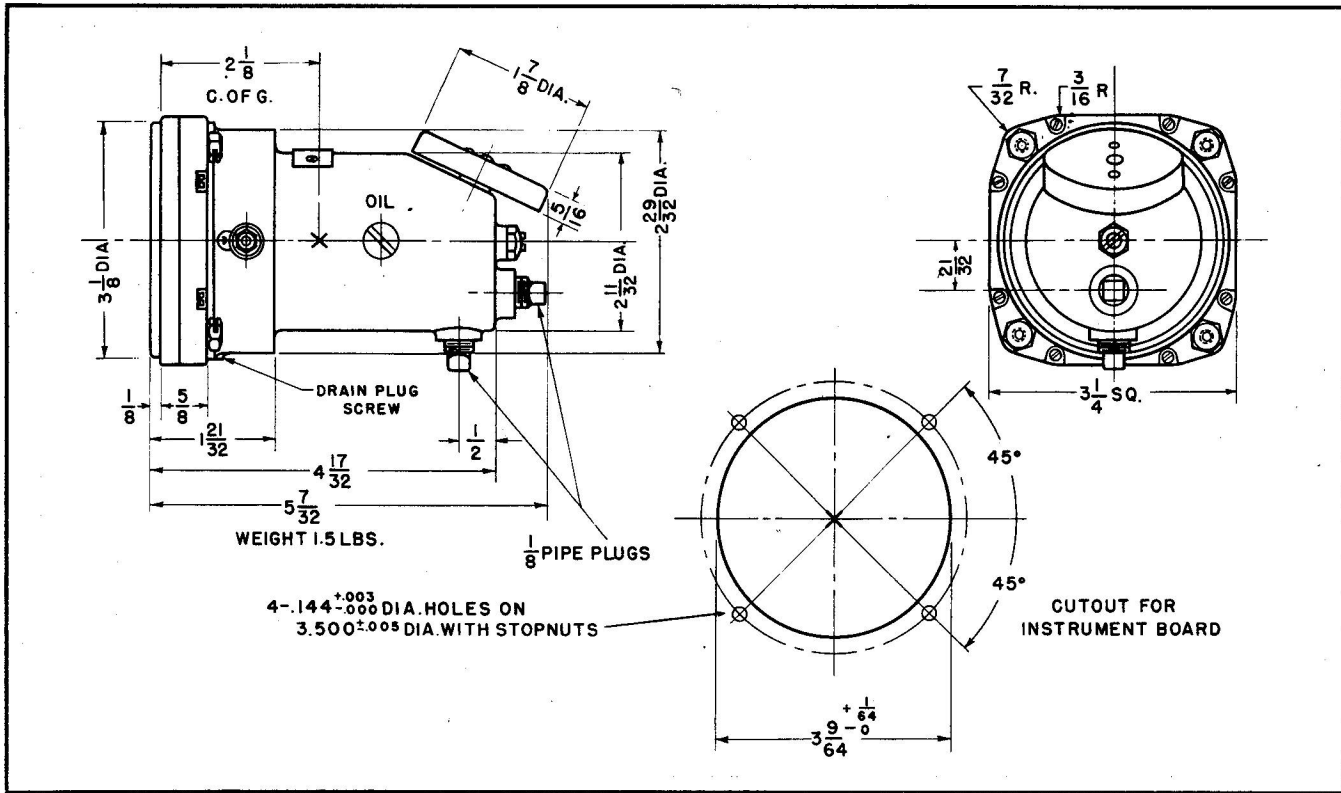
Dimensional Drawing—Navy Type FSSC 18-1-462 (Pioneer Type 1713-1Y-A1).
